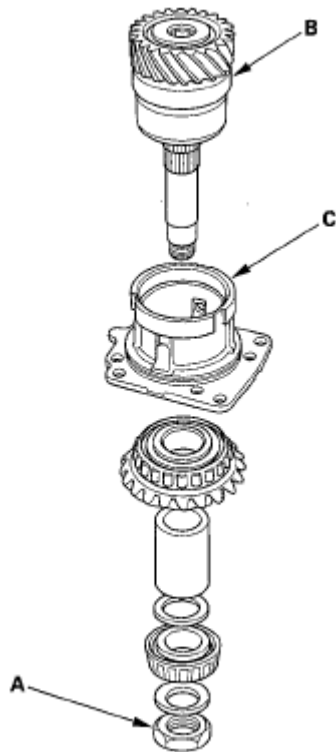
Identifying Locknut, Transfer Shaft Assembly And Transfer Holder
